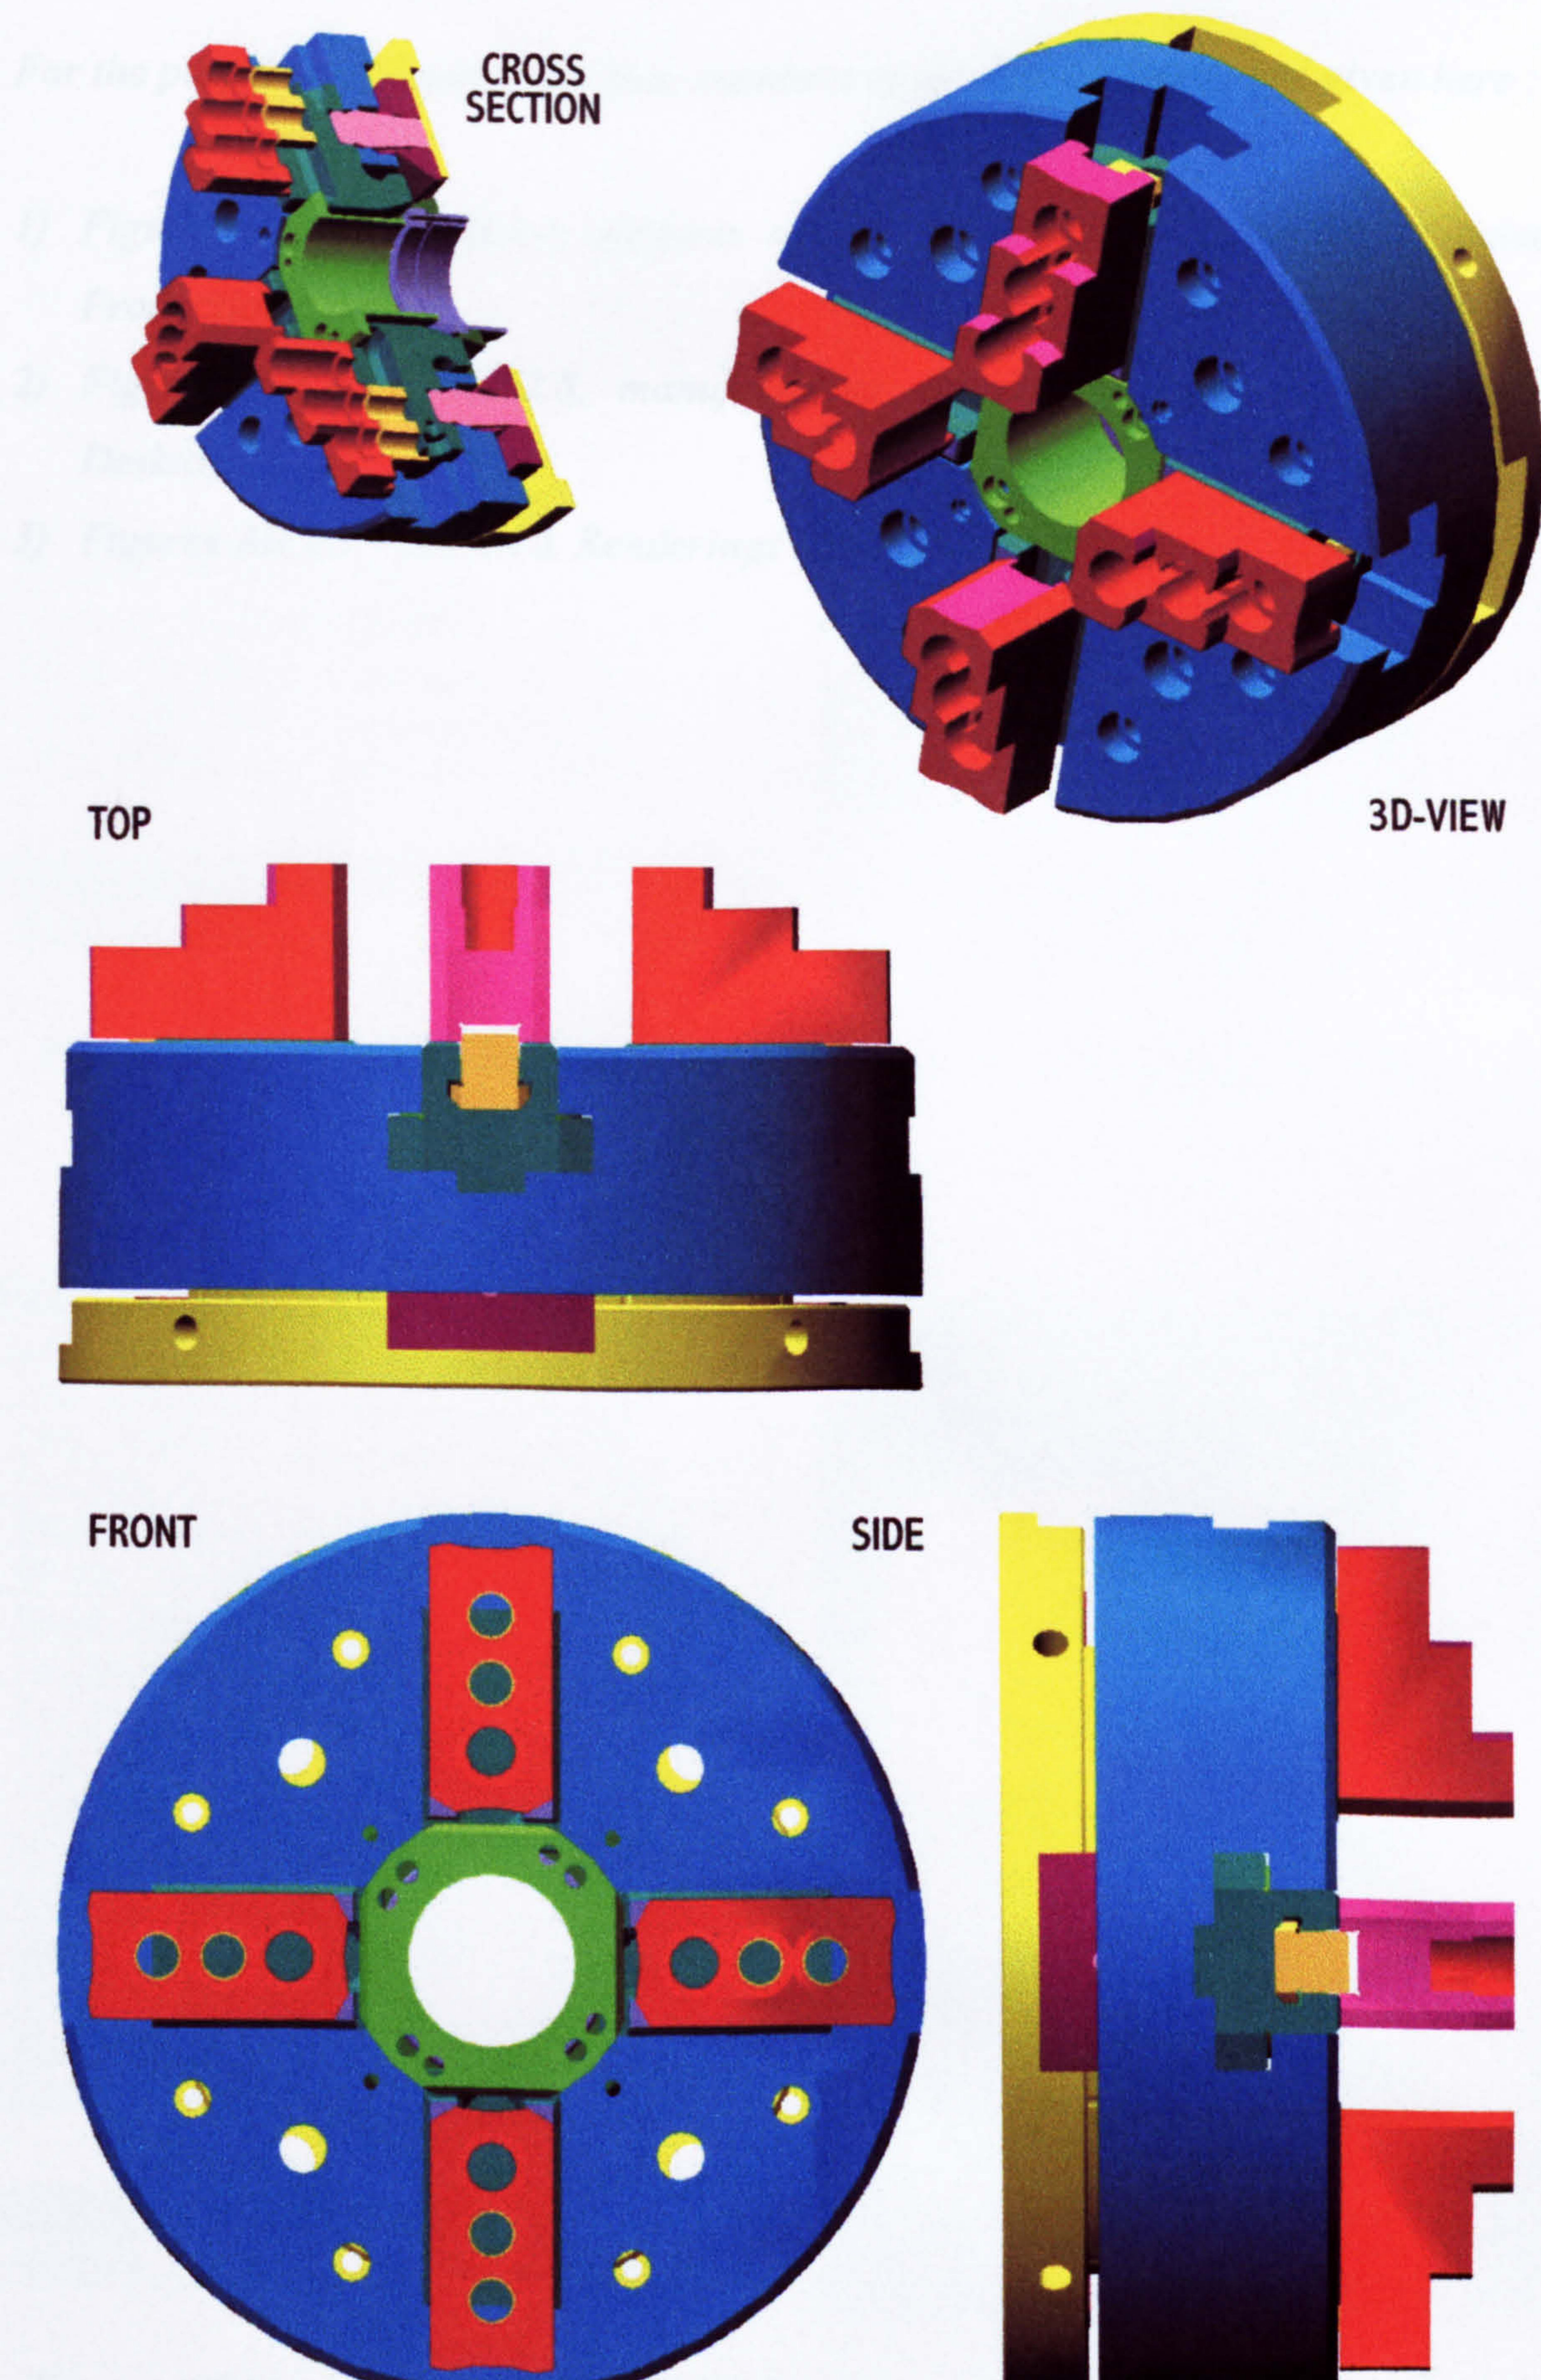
Assembly Views for the 4B250-PHNC Chuck
